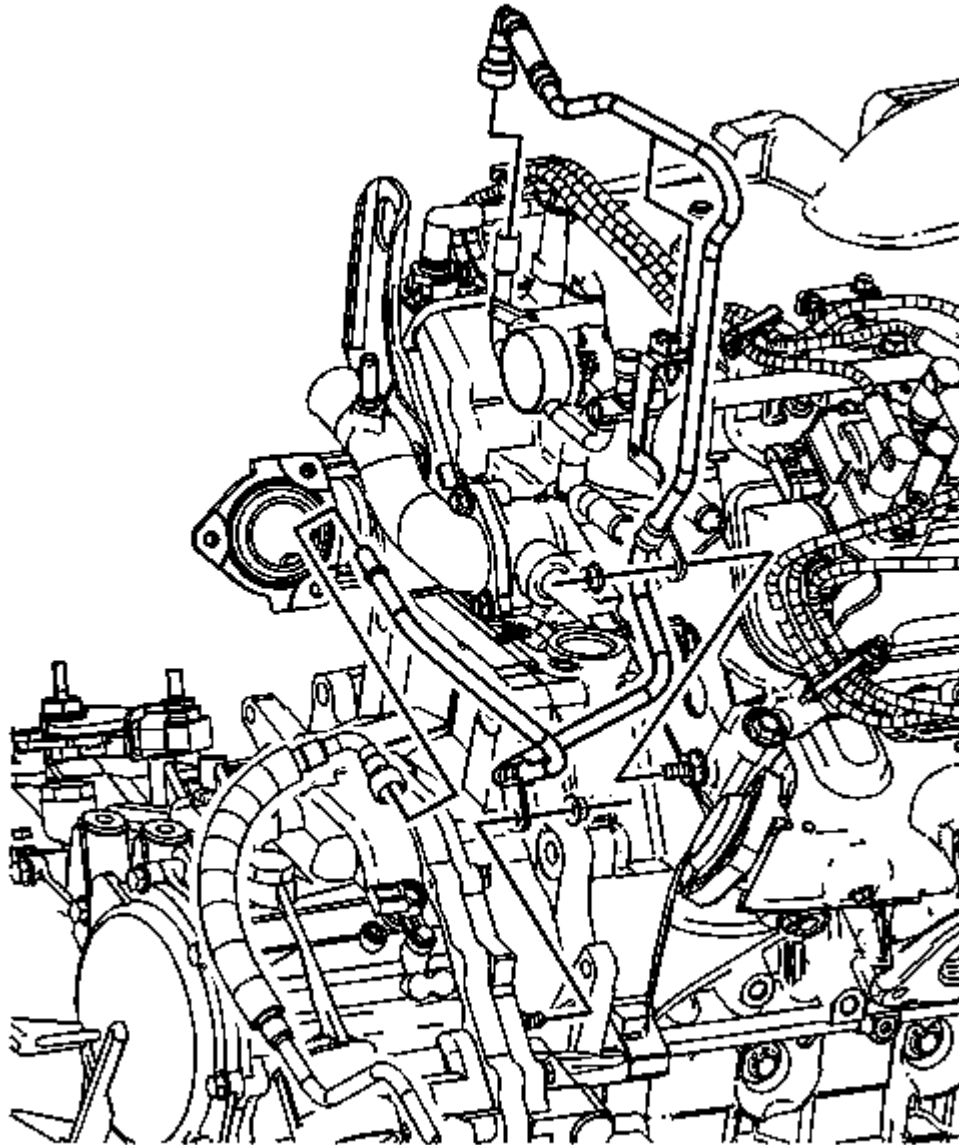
View Of Hose/Pipe Retainer-To-Right Cylinder Head Nut & Fuel Pipe-To-Transaxle Nut
